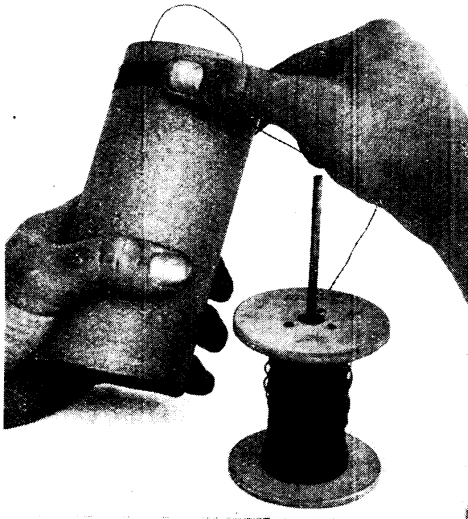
With the aid of an assistant to control the spool of wire, coil winding can be carried out with speed. The wire should be kept taut, and the winder, in this case, is using a piece of wood to guide the wire on to the tube
